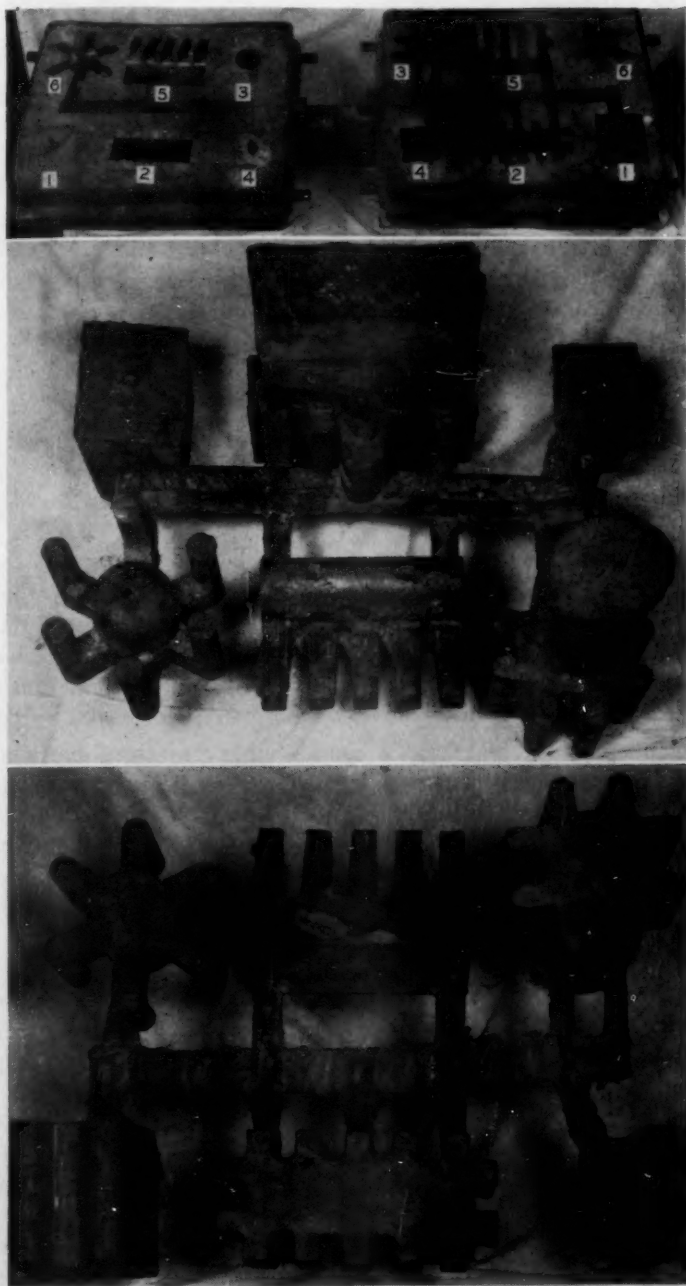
TOP—COMPOSITE MOLD IN WHICH PATTERNS NOS. 1 TO 6 WERE POURED THROUGH A SINGLE DOWNGATE WITH RUNNERS LEADING TO THE INDIVIDUAL CAVITIES. FIG. 8—CENTER—COPE VIEW OF COMPOSITE CASTINGS AS REMOVED FROM MOLD. FIG. 9—BOTTOM—DRAG VIEW OF COMPOSITE CASTINGS AS REMOVED FROM MOLD.
